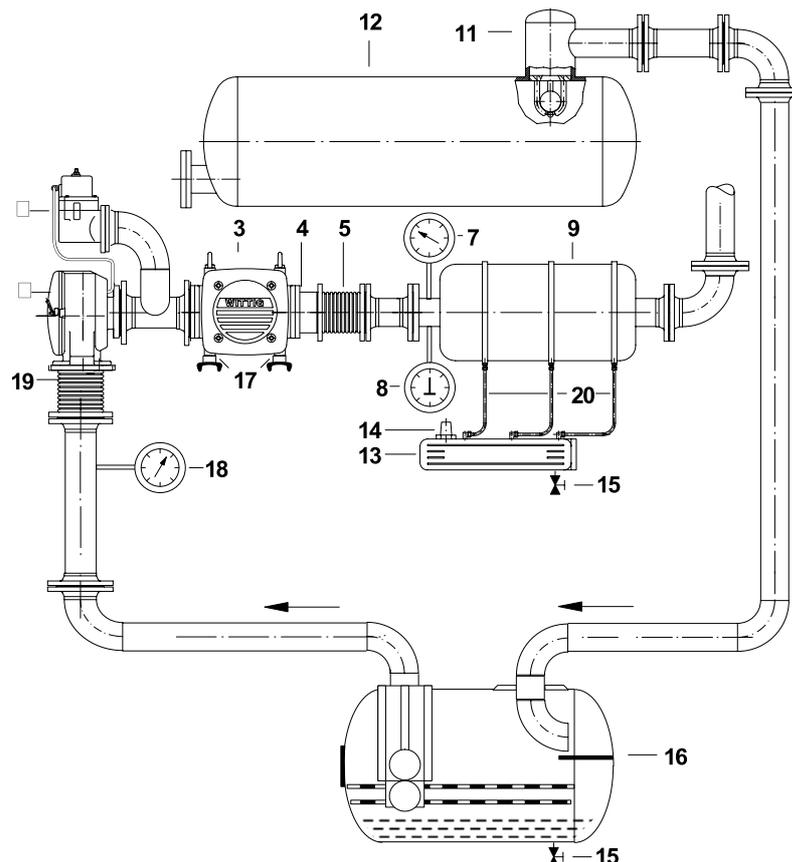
Machine diagram with a compressor and vacuum pump
